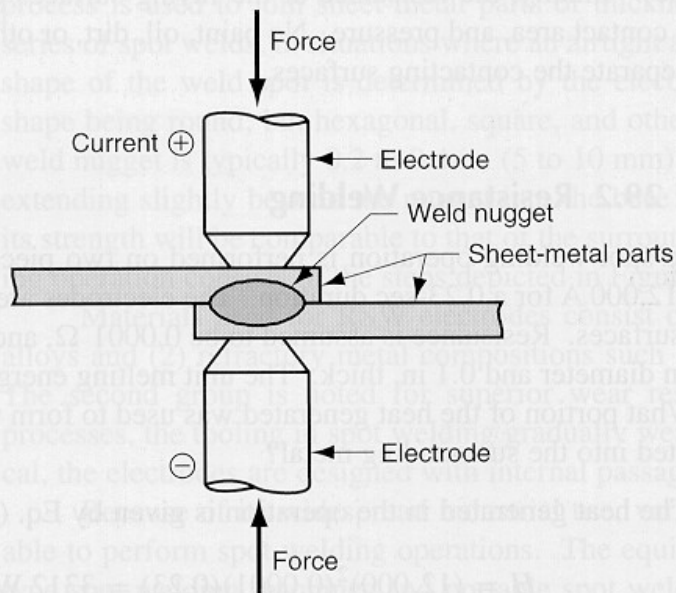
Resistance welding, showing the components in spot welding, the predominant process in the RW group.
